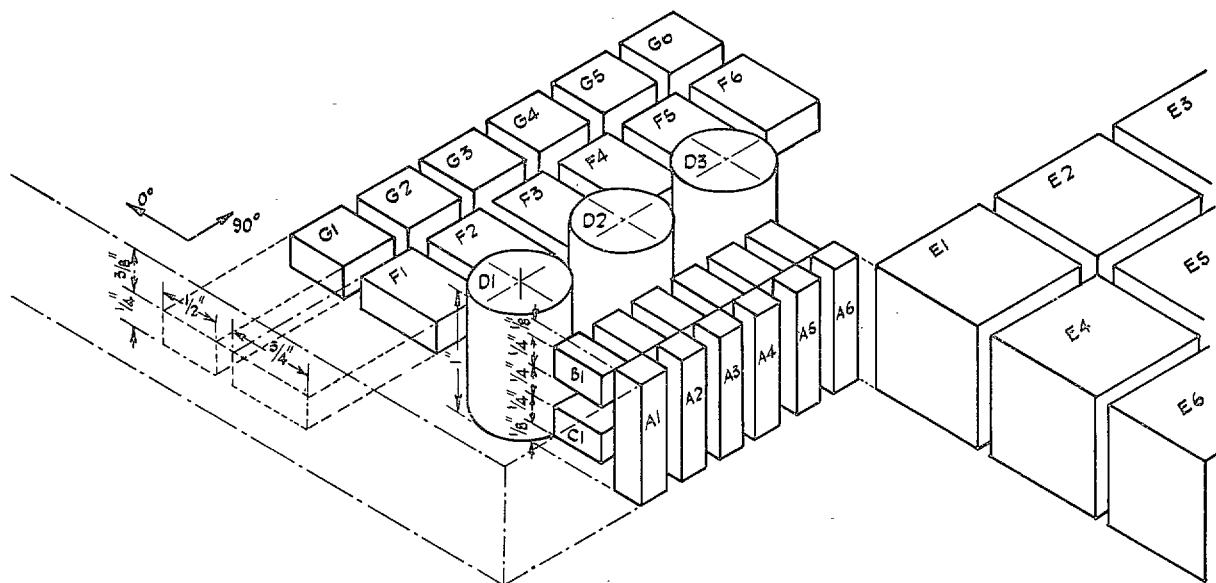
Position of test pieces cut from 1-in. thick boards.
